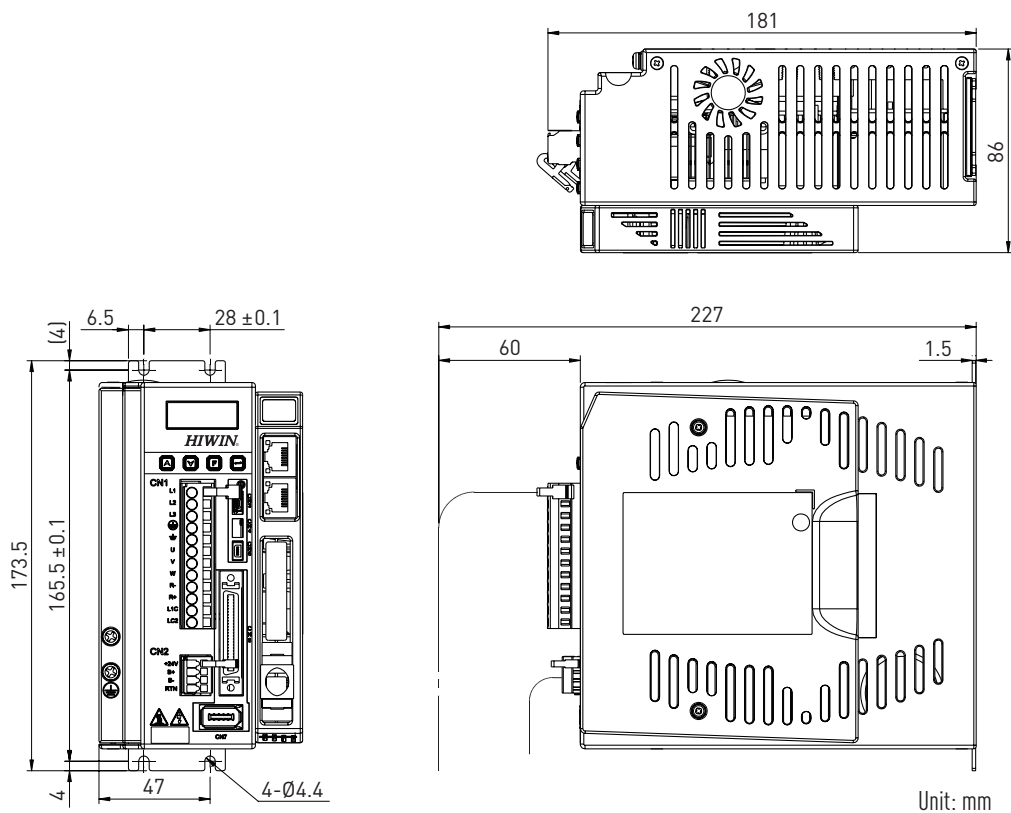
Dimensions D2(T)-10xx-F-xx and D2(T)-10xx-E-xx
